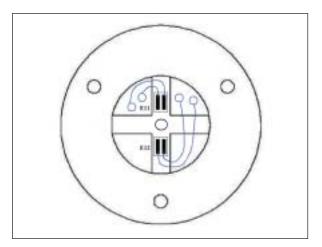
Lower face of the sensor-equipped base showing the wiring.
